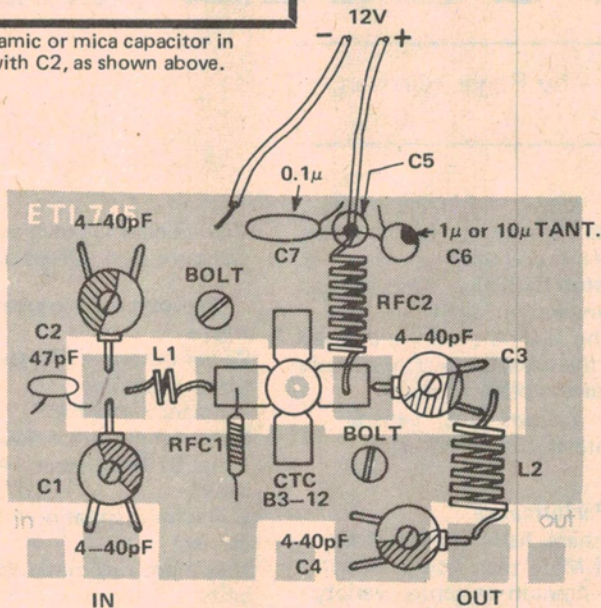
Construction and component layout of the ETI-715D 3W two metre amp.
